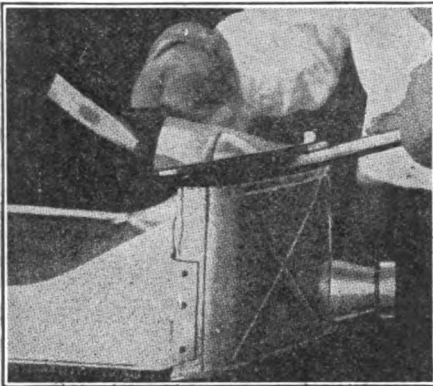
PEENING THE RIVETS ON THE UPPER TANK
